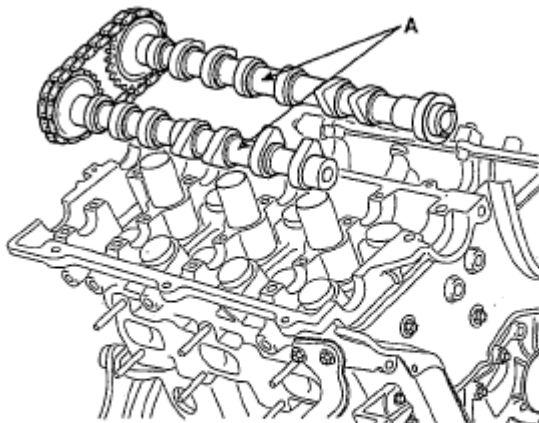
Identifying Camshaft Bearing Caps (1 Of 2)
